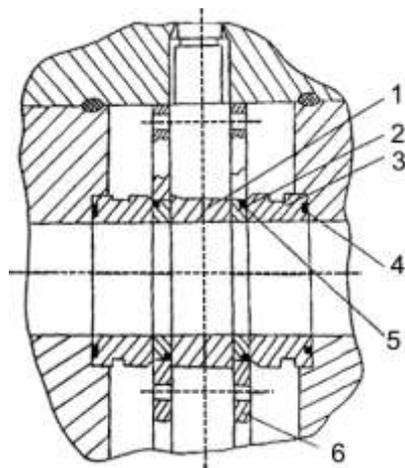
Straight-through valve. 1 – shield; 2 – saddle ring; 3 – saddle; 4 and 5 – saddle seals; 6 – shield (guide).
